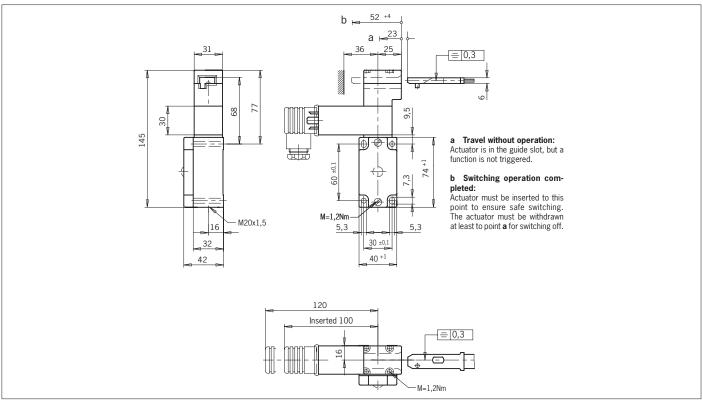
Dimension drawing for NZ1VZ-...VSM/VSE with cable entry
